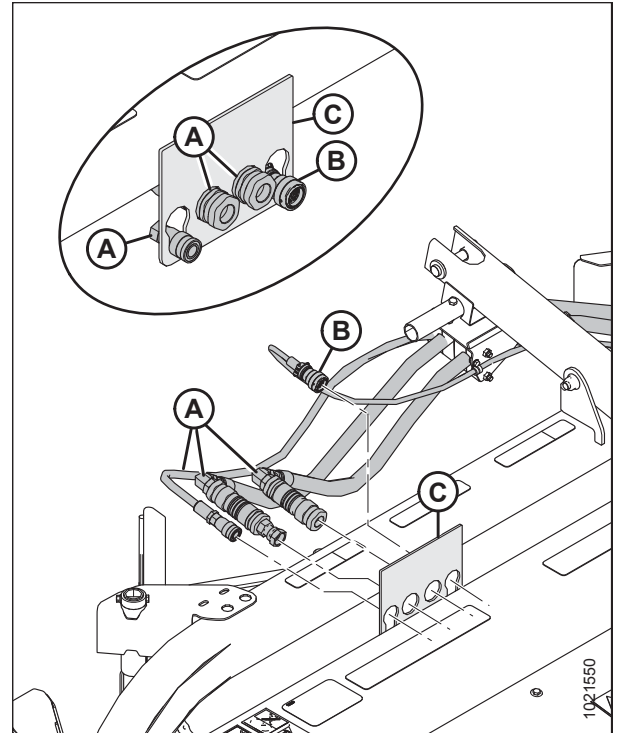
Hose Support Weldment, Storage Position
